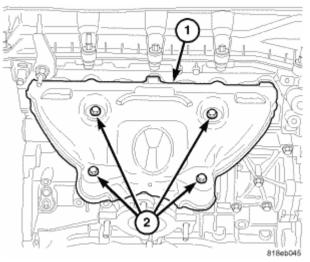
EXHAUST MANIFOLD HEAT SHIELD Courtesy of CHRYSLER LLC
